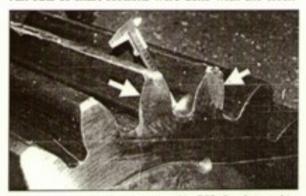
Appearance of teeth deposited by ESS after their machining in the gear-milling machine
